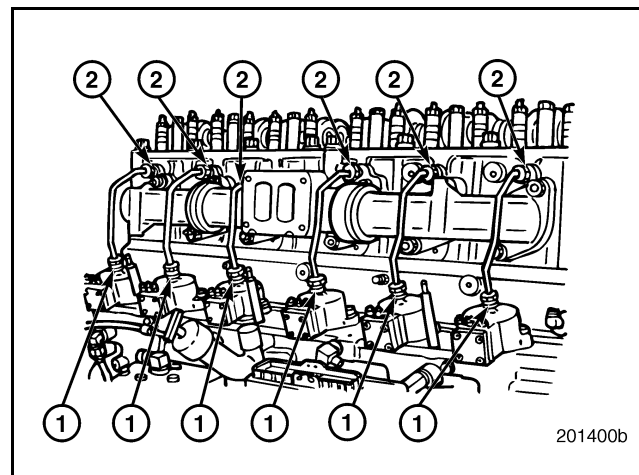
Fuel Nozzle Inlet Tube Assembly Installation
